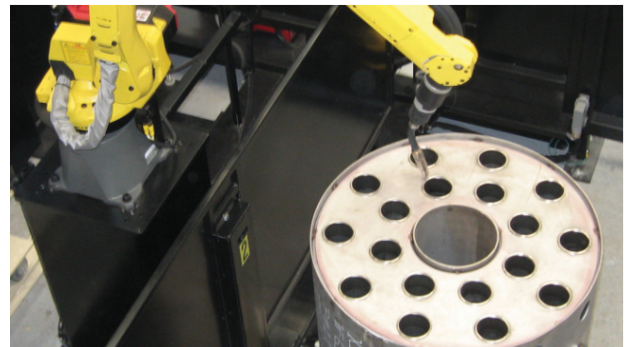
TIG Welding in progress with 6-axis Robotic
